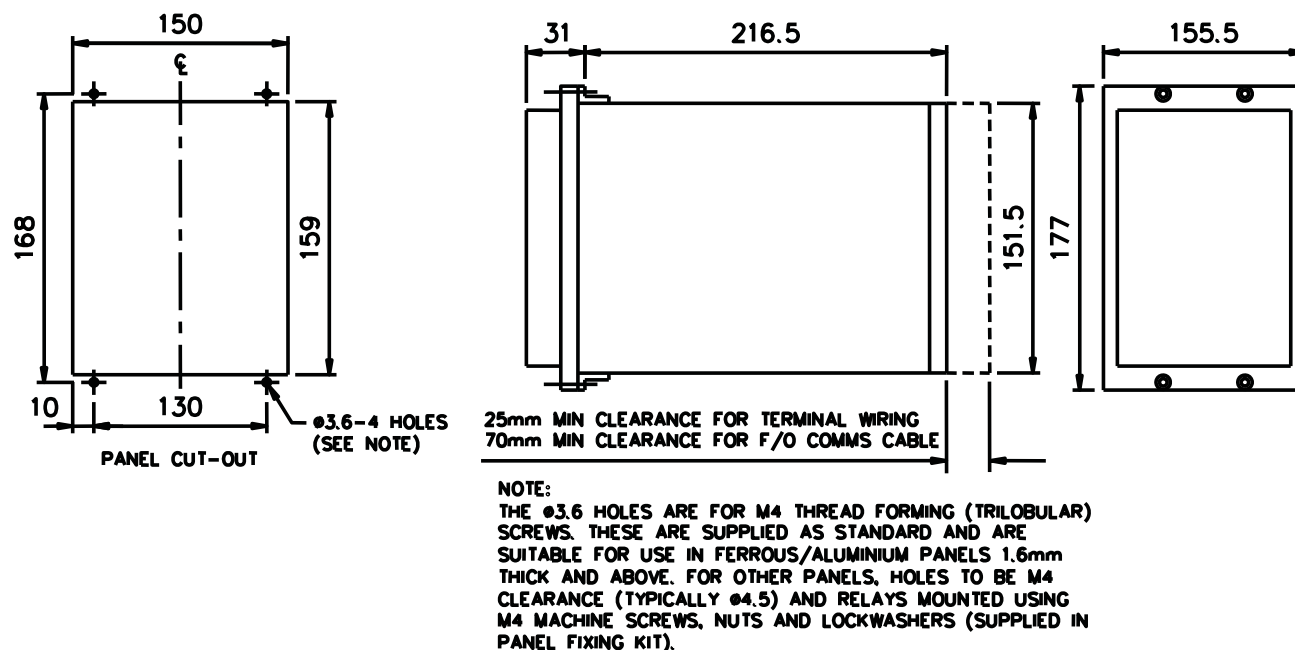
E6 Case overall dimensions and panel drilling details (All dimensions in are mm)
